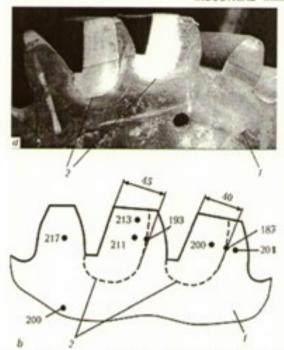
Appearance of end parts of the teeth after ESS and machining of top sections (a) and scheme of the shape and depth of teeth penetration (b): 1 — gear shaft end; 2 — penetration shape: spots and values of HB hardness are shown by dots
